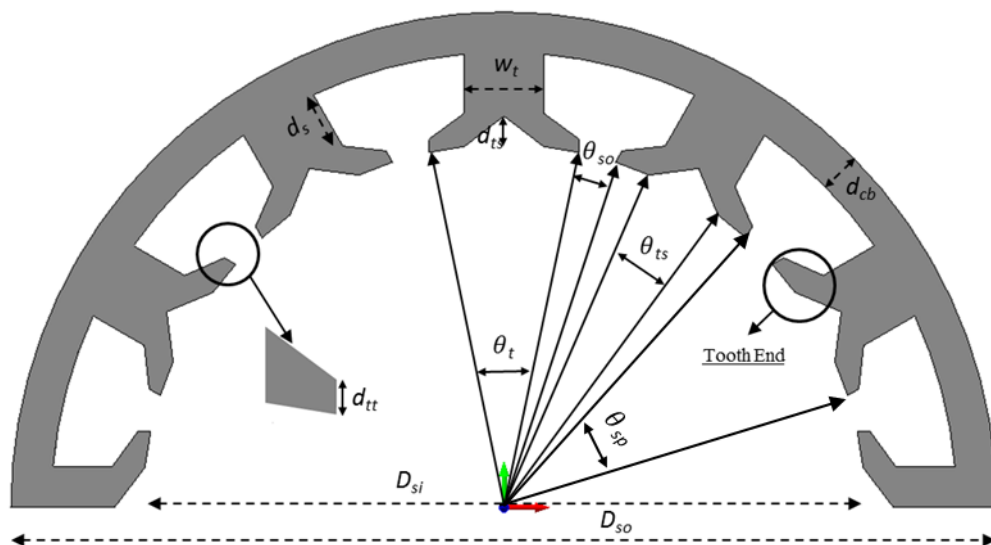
Outer Stator Dimensions of the STPM Machine.
